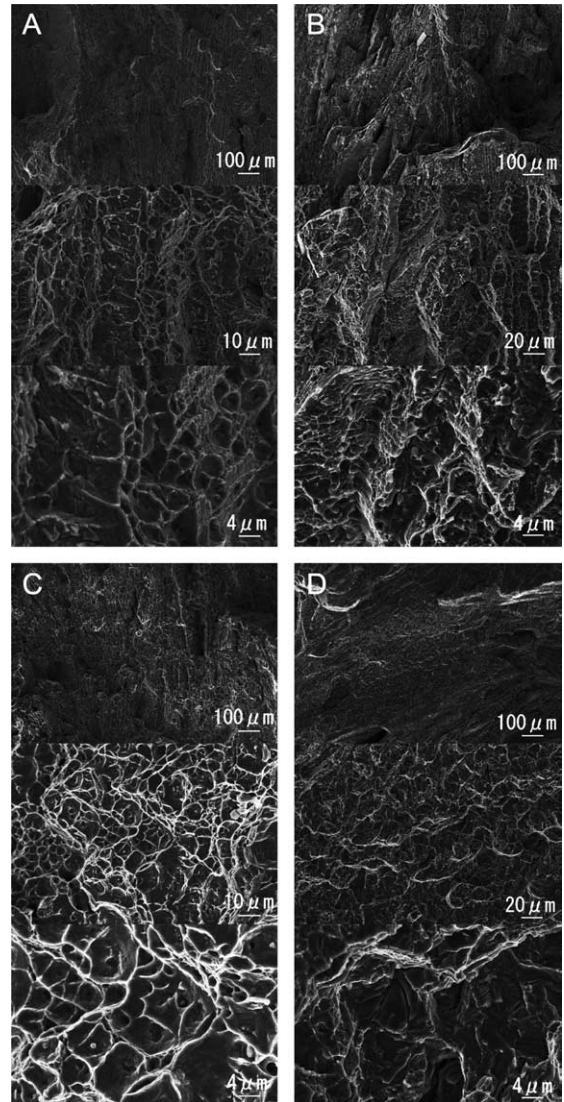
Fractography of ruptured surface: (A) as-welded tensile specimen, (B) aged tensile specimen, (C) as-welded  $J_{IC}$  specimen, and (D) aged  $J_{IC}$  specimen.
